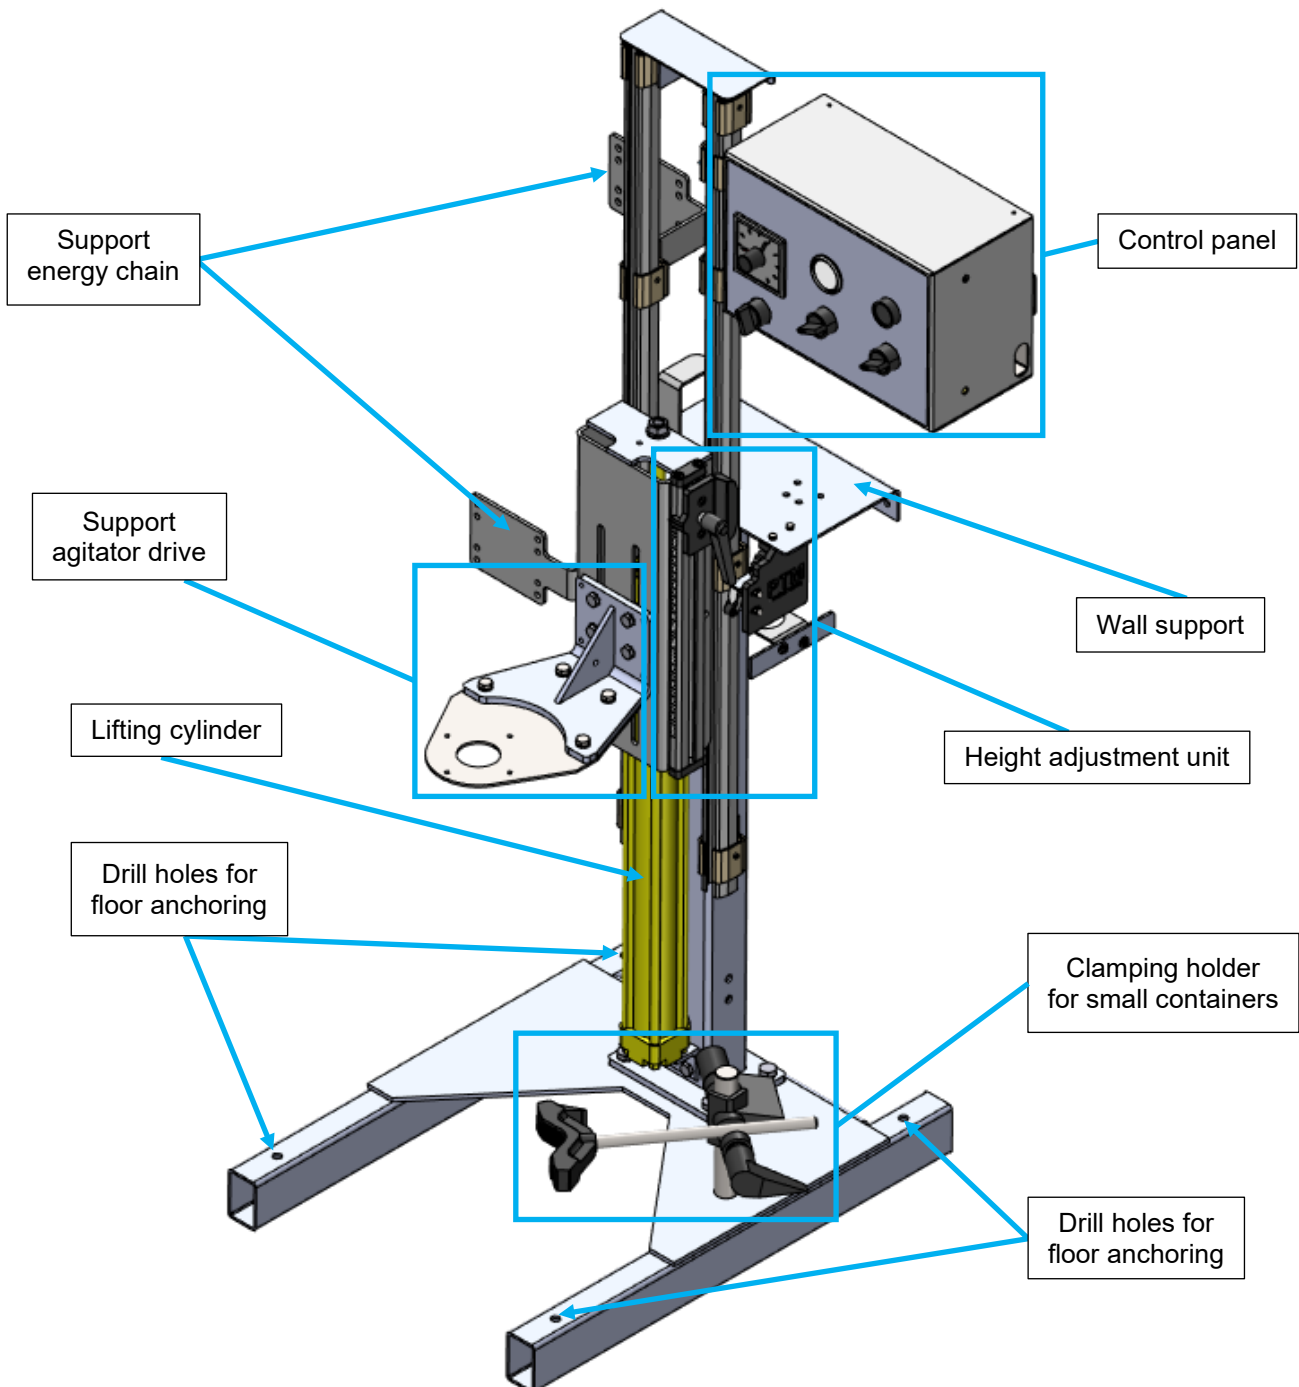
Stand-mounted agitator with height adjustment and clamping holder for small containers
